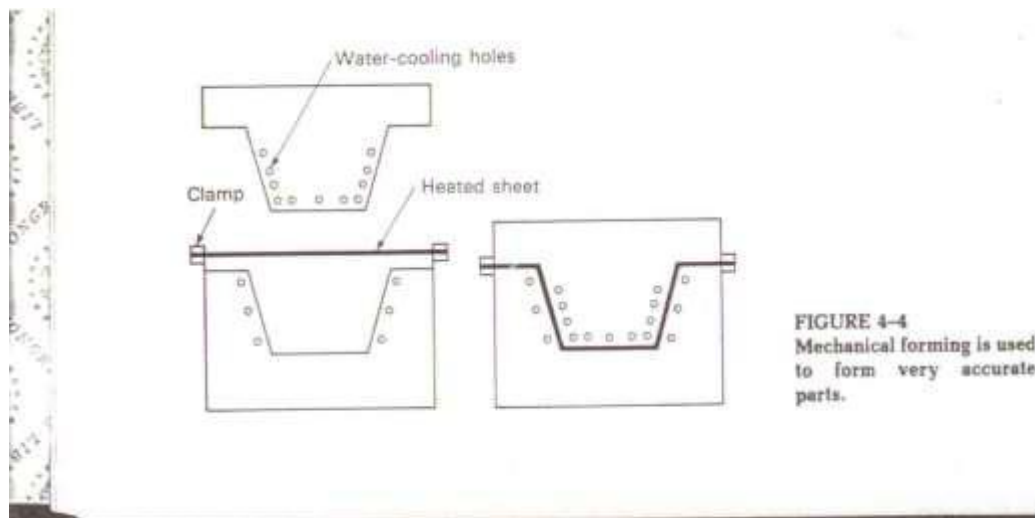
shows a typical matched mould. This technique of thermoforming is used to make accurate parts. Excellent detail such as lettering or texturizing can be done with mechanical forming.
